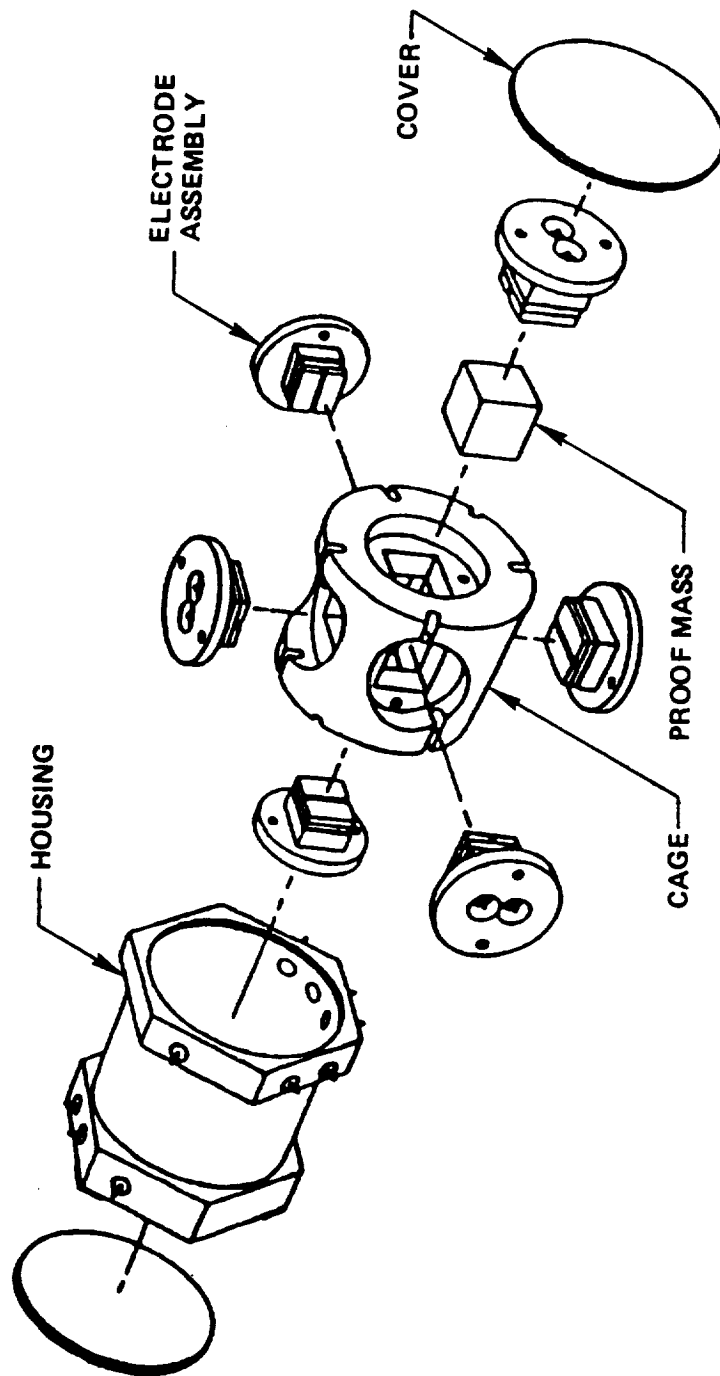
MESA CUBE PROOF MASS MECHANICAL ASSEMBLY
